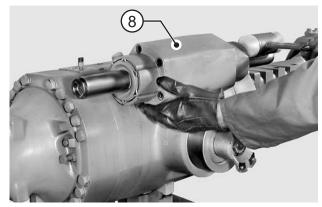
Extract the steering cylinder (8) using a plastic hammer.
